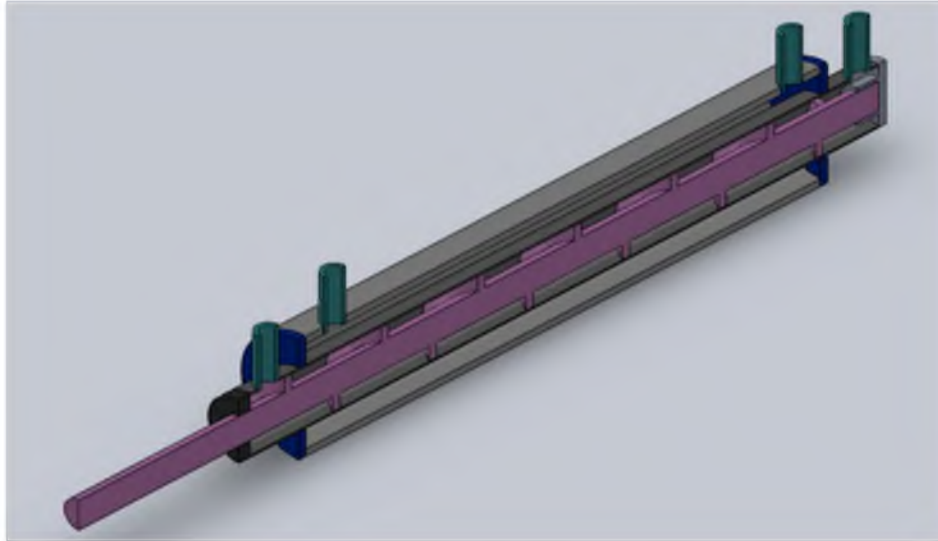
Cut-view of SCEv1. In conceptual model, the rotating screw shaft is held in place by a rotating seal (black cap on inner tube) and a molded bearing plate (grey cap, inner tube).
